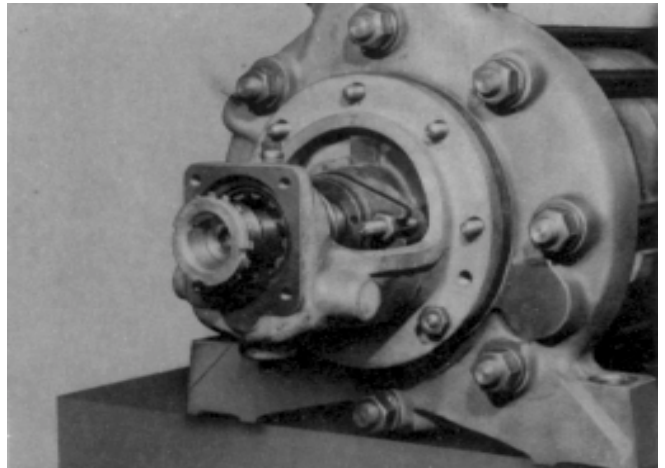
Dismantled inner components of cylindrical roller bearing.
